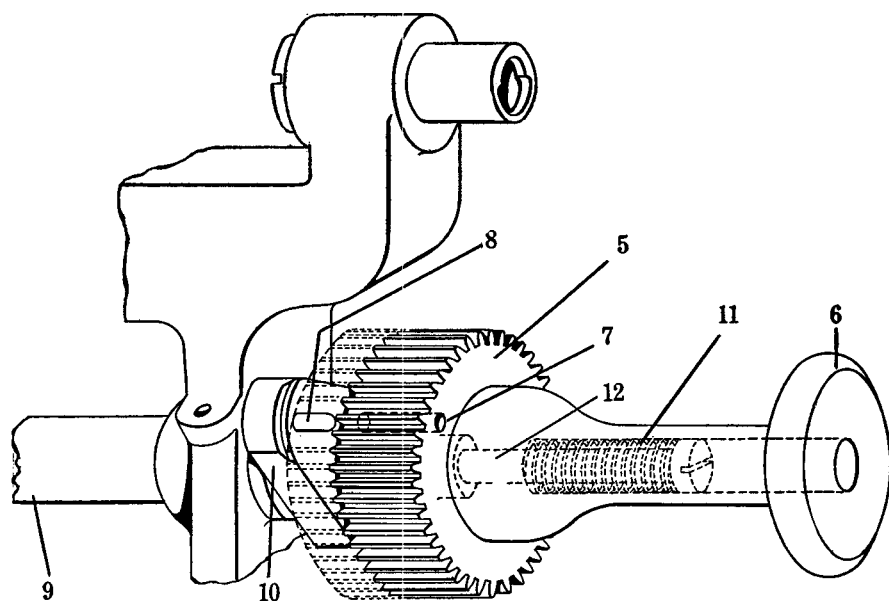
Another view of the mold disk turning pinion 5. The driving shaft for the mold disk is shown at 9. Mounted on the shaft 9 is a sector 10 on which is fastened a pin 8. The mold disk turning pinion has a hole 7 passing through it. The shaft 9 drives the mold disk pinion through the pin 8 in the hole 7 of the pinion. When the mold disk turning pinion 5 is pulled by hand toward the front of the machine, the pin 8 is disengaged from the pinion 5, but the teeth of the pinion remain in mesh with the teeth of the mold disk, thus allowing the disk to be turned by hand. Inside of the mold disk turning handle is a compression spring 11 around a stud 12 which is screwed into the center of the sector 10. This spring, acting between the head of the stud 12 and a seat in the pinion handle, pushes the pinion toward the rear when the hole 7 through the pinion registers with the pin 8 on the sector, and holds the parts together on the shaft 9.
